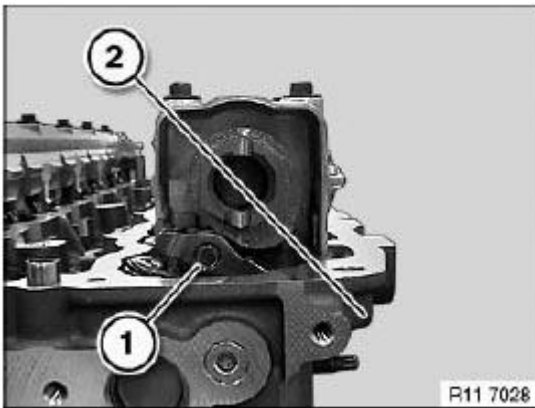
Identifying Exhaust Camshaft Position And Cam Follower
